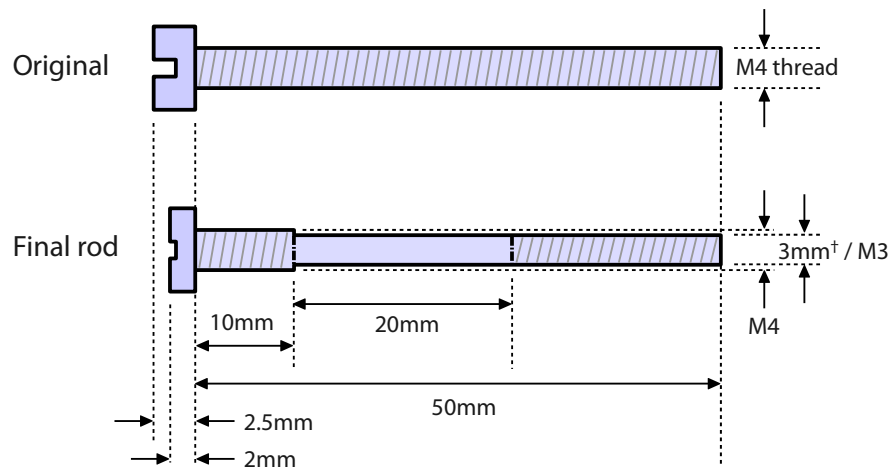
The smooth rods are machined from 50 mm M4 bolts. The 10 mm closest to the head is left unchanged; the next 20 mm are turned to a smooth 3 mm; the final 20 mm have an M3 thread cut on. [†]Although the ISO standard dictates that an M4 thread should not cut down to a diameter of 3 mm, mass produced bolts usually cut beyond this, so the central portion has a diameter slightly less than 3 mm.
